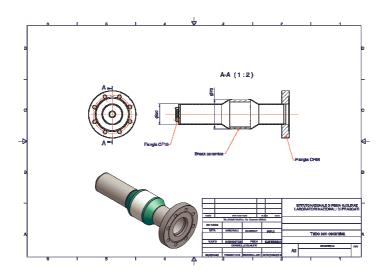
Mechanical view of the external tube of PRESSMAGO optics.
